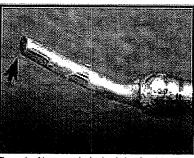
Close-up of wire lead showing joint at right. Arrow points to fractured lead. 12x
